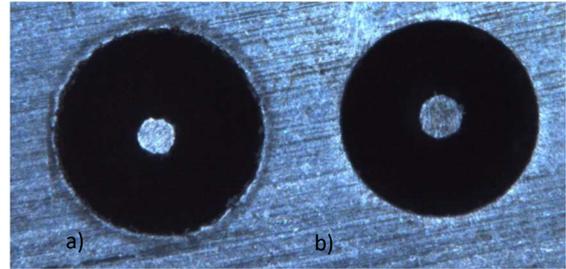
Bore hole a) wet EDM; b) near dry EDM.
